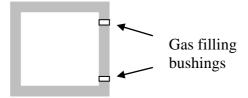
Gas filling bushings in the spacer of a glass unit.
